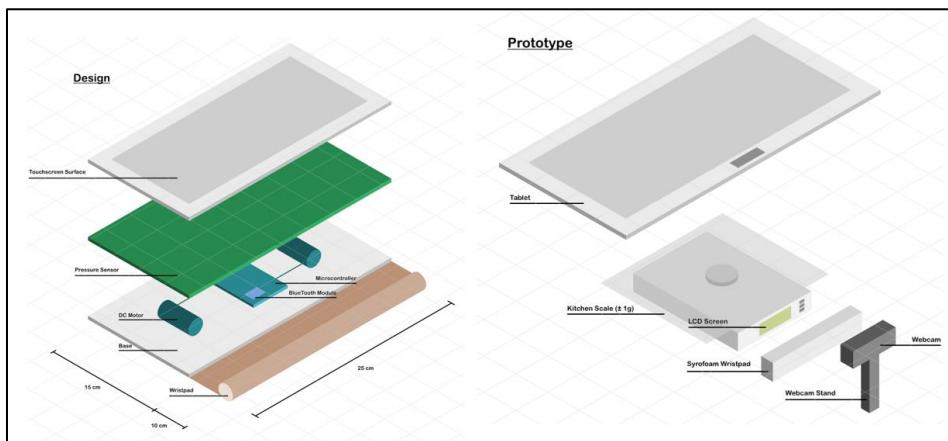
Technical drawings of the envisioned final design (left) and the prototype (right).
